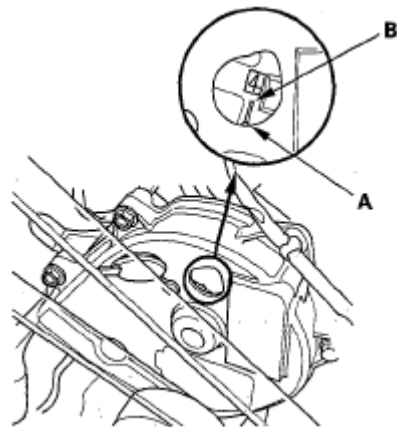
Identifying Pointer On Front Upper Cover With No. 4 Piston TDC Mark On Front Camshaft Pulley
